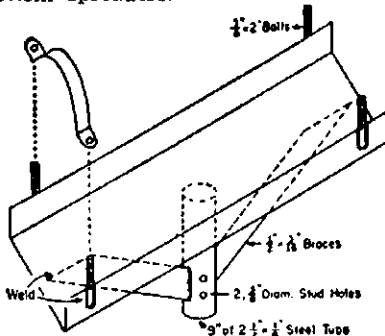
The boom mount is made of a 2 ft. length of 2" x 3/16" channel with four 3/8" x 2" bolts welded as shown. The clamps are 2" x 3/16". The support pipe is braced diagonally by 1/2" x 3/16" stock.
